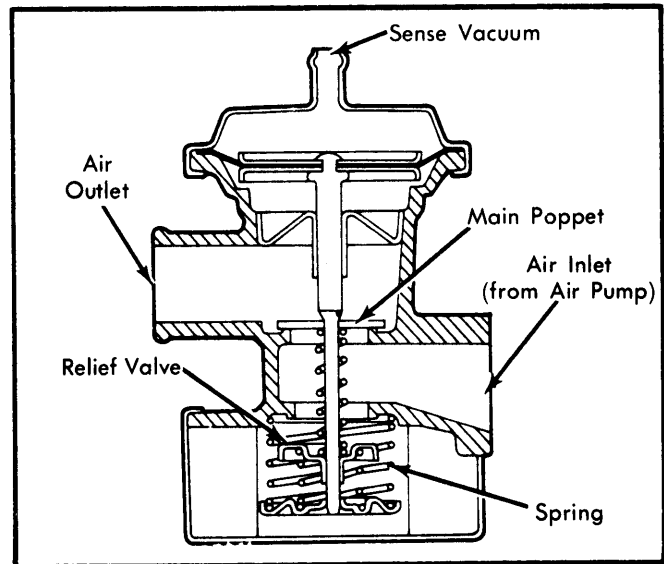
Cutaway View of Air Bypass Valve (Normally Closed Type)
